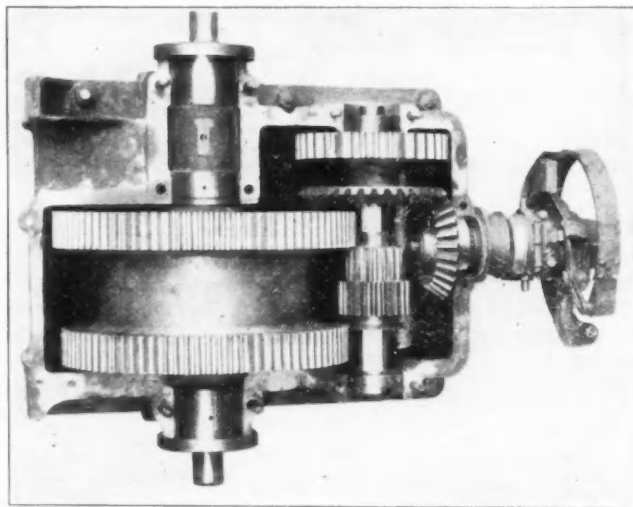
MINNEAPOLIS STEEL & MACHINERY COMPANY'S CLUTCH AND TRANSMISSION
